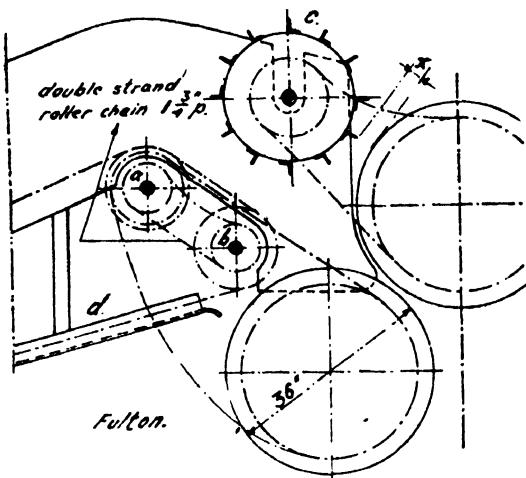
Improved Apron Carrier with Floating Forced Feed Roller.
